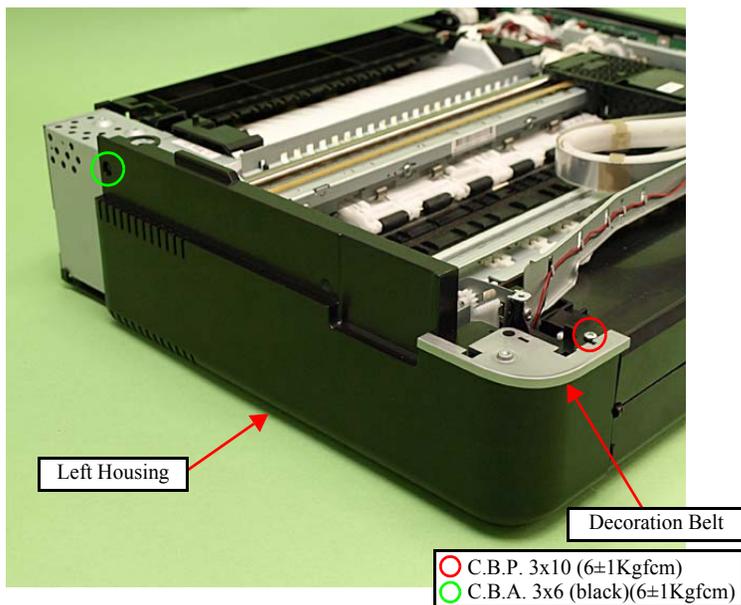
Removing the Left Housing/Decoration Belt L (1)
